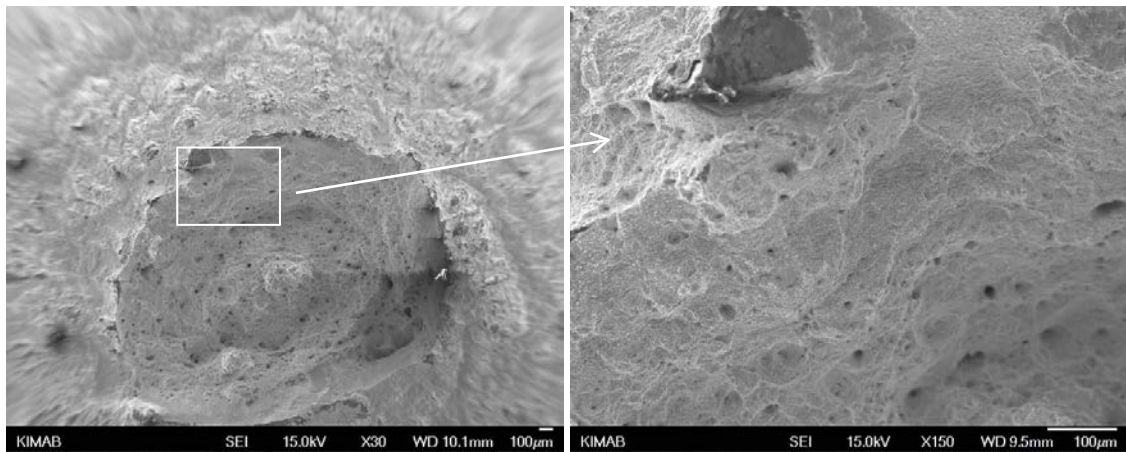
Appearance of the fracture surface after SSRT test in 10 mM sulfide at 80 °C.
